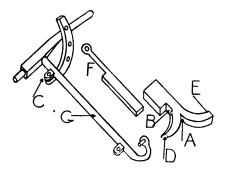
METHOD OF FORGING SHIFTING BAIL.
